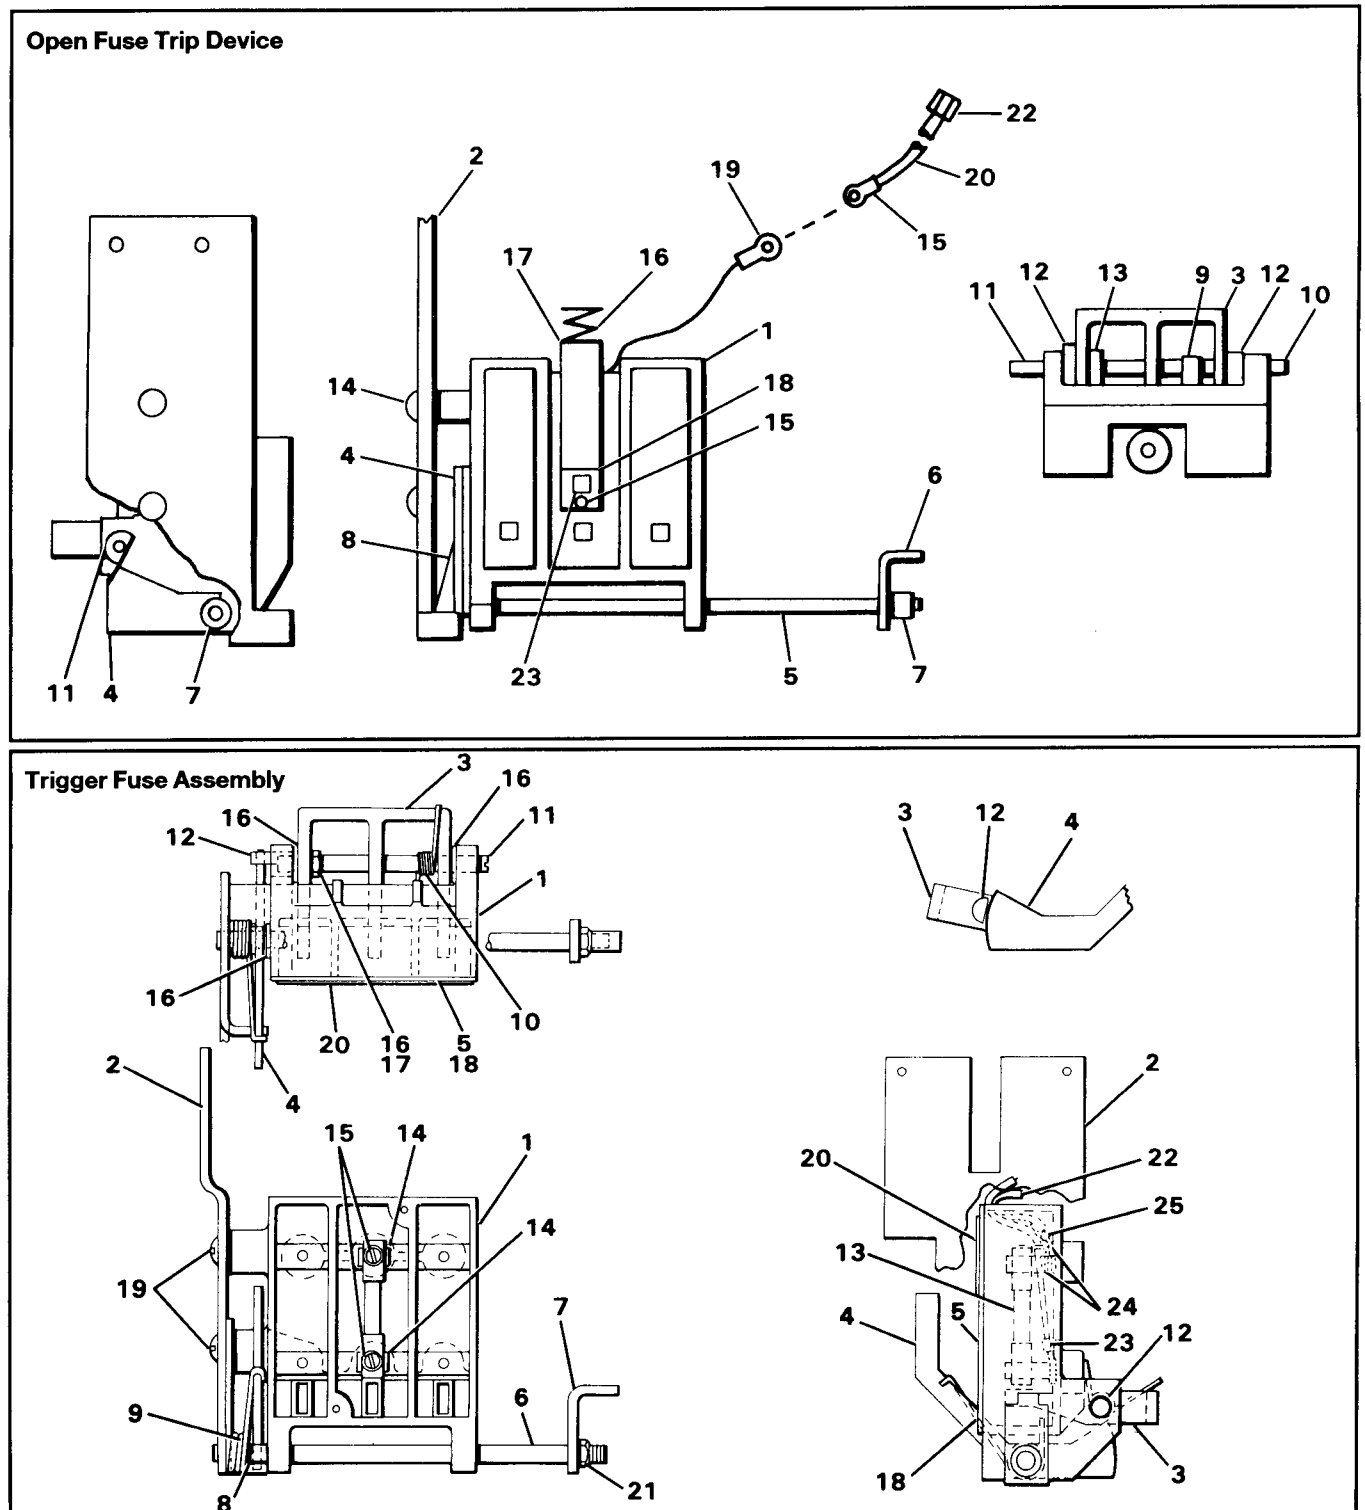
Open Fuse Trip Device, Trigger Fuse Assembly
